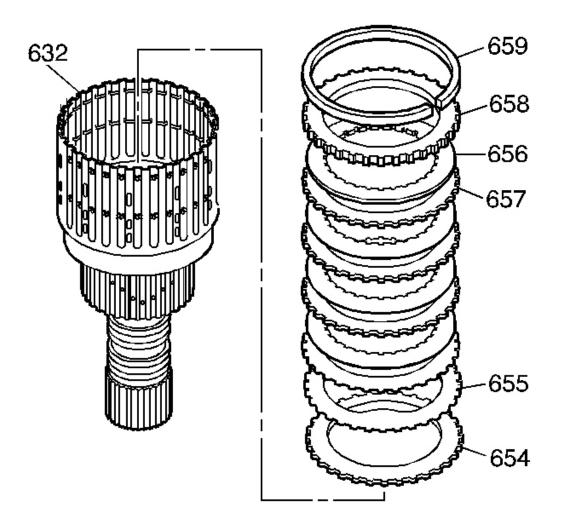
View Of Input Clutch Plate Assemblies Courtesy of GENERAL MOTORS CORP.
